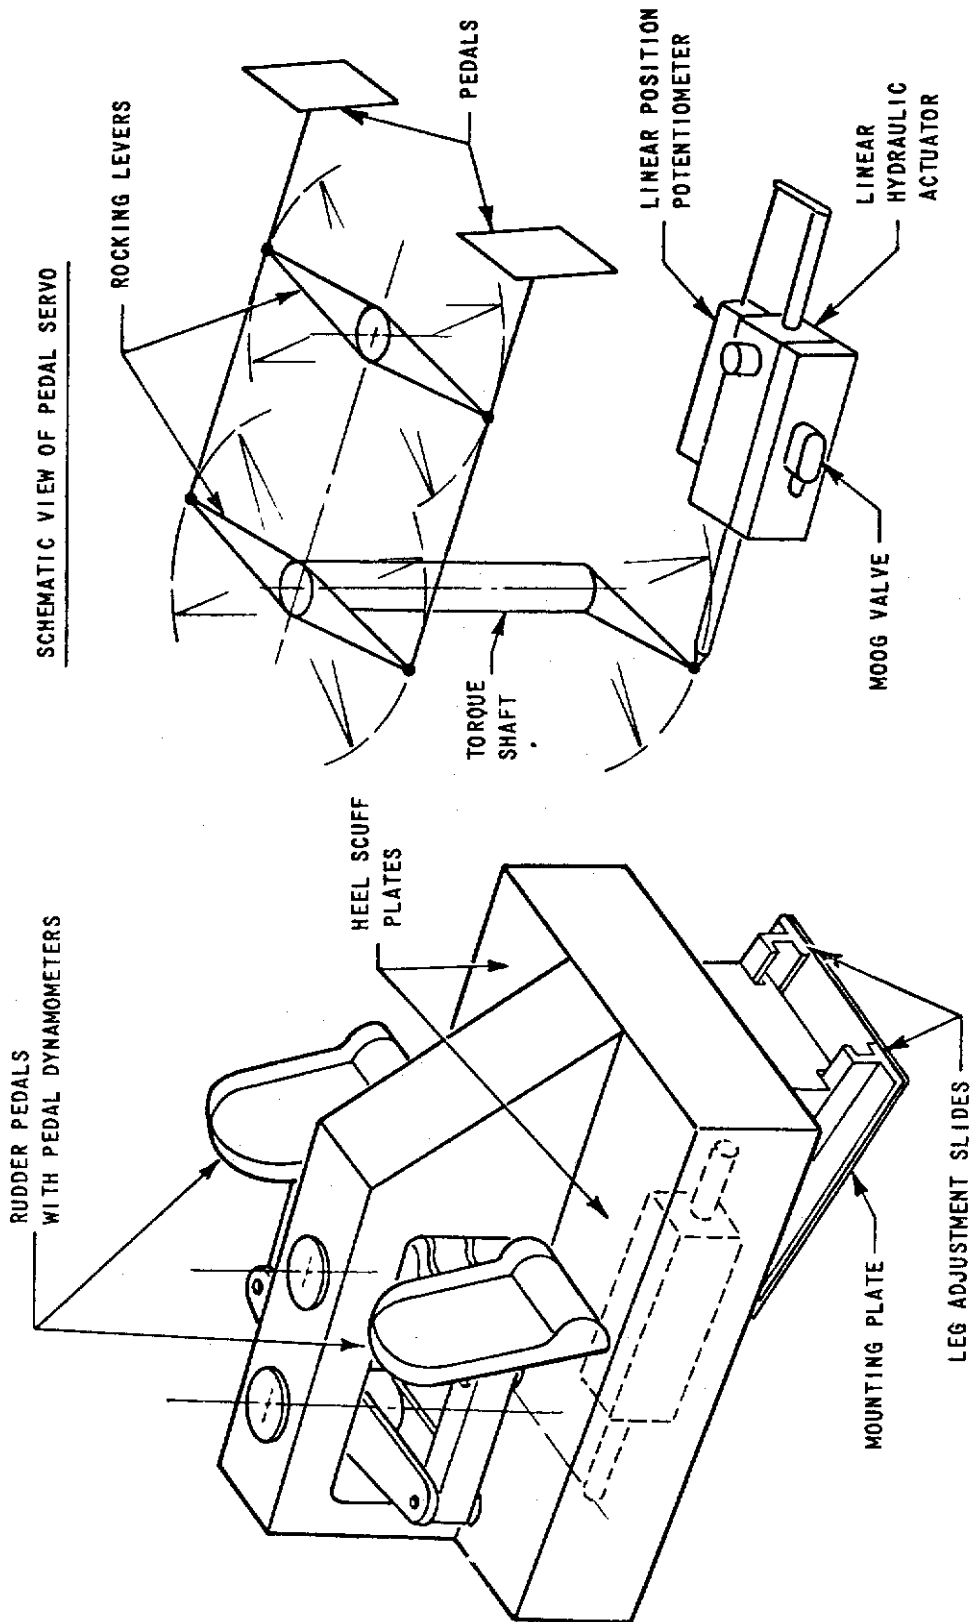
RUDDER PEDAL SERVO ASSEMBLY
